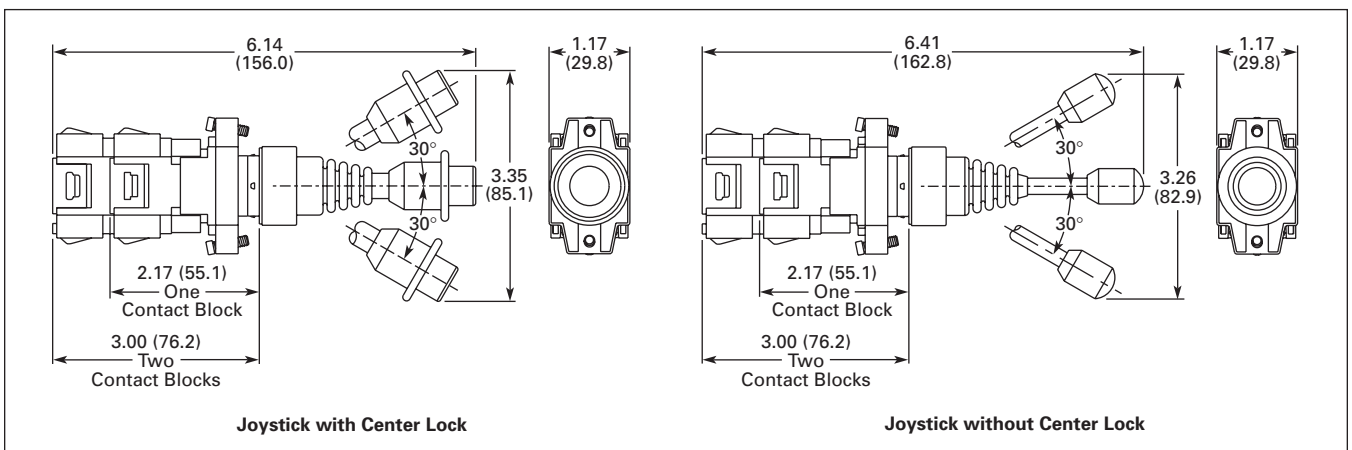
Joystick Operator Dimensions — Approximate Dimensions in Inches (mm)
